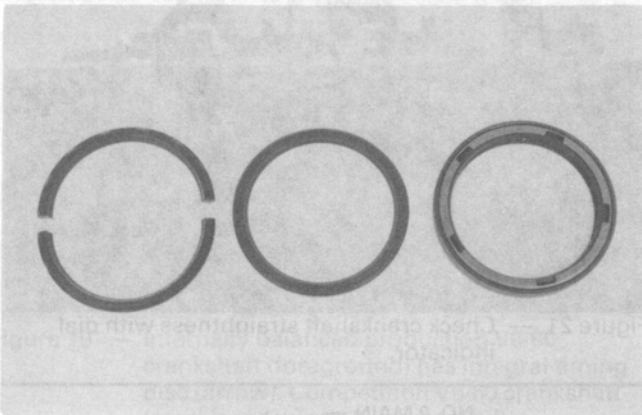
V6/60 rear main bearing seals (left to right): early-style two-piece rope seal replacement; late-style one-piece lip seal replacement for small journal crankshaft; one-piece rear seal for large journal crankshaft.
